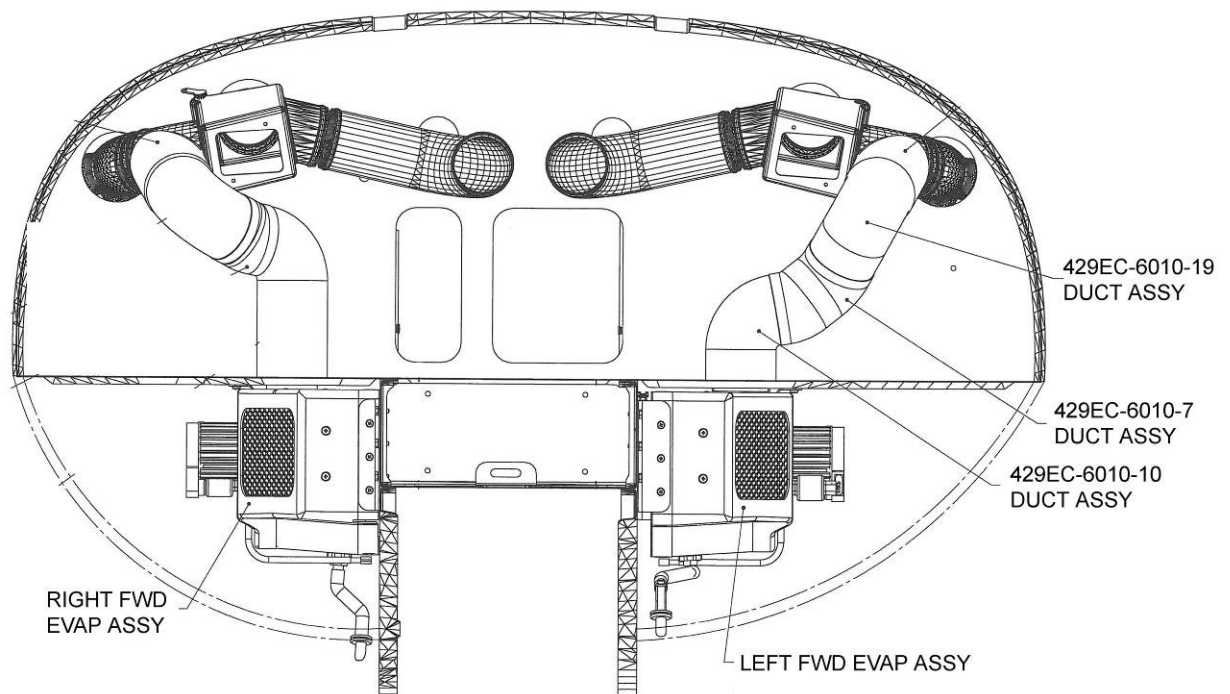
View Looking Aft at Fwd Evaporators and Ducting
